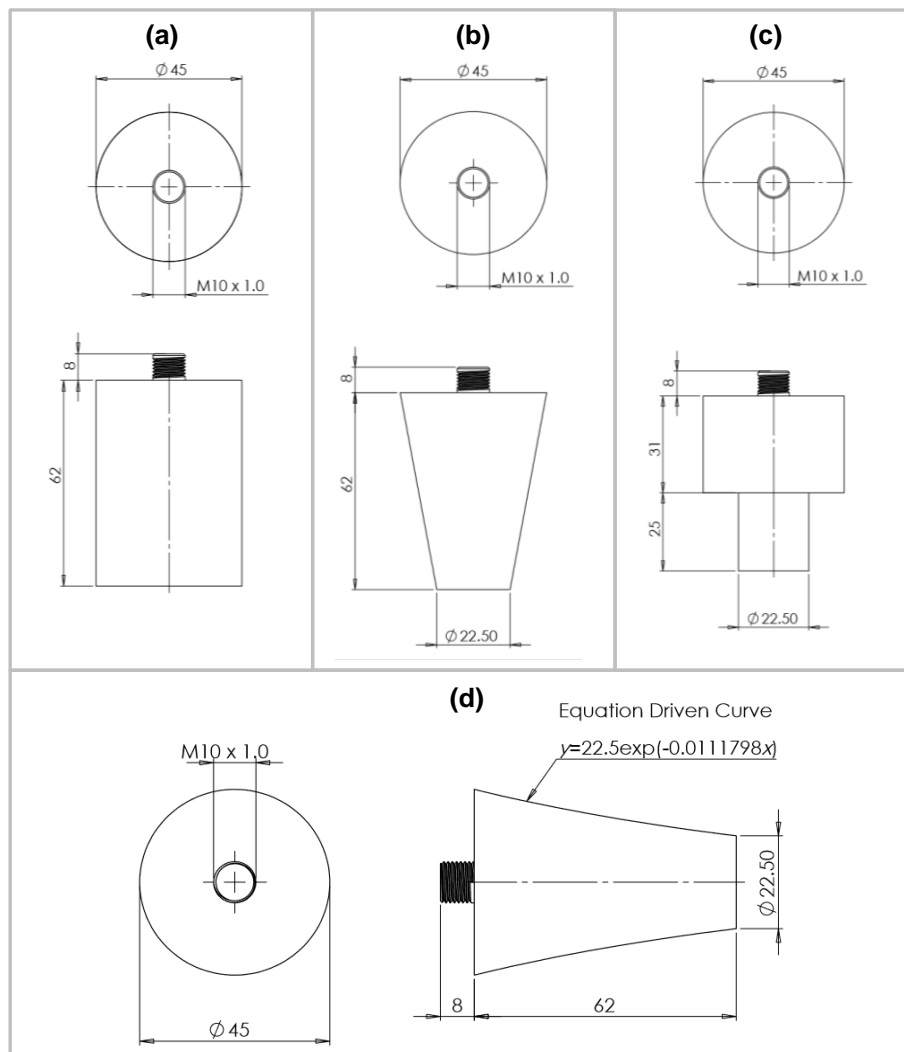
Technical drawings of final ultrasonic horn shapes (a) cylindrical, (b) conical, (c) stepped and (d) exponential
